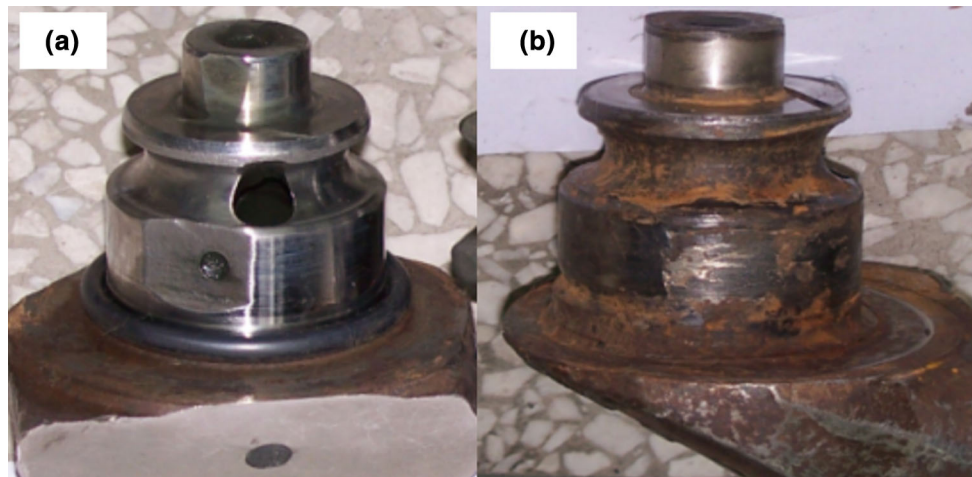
Bearing (a) with good seal (b) with seal failure
